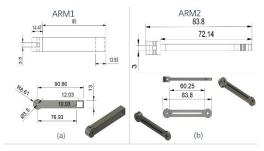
CAD Design of Robotic Arm Components (all dimensions in mm)
